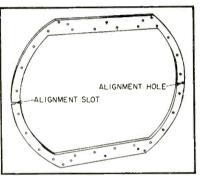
Spacer frame. Aperture mask is bolted to one side of this frame, glass plate, carrying phosphor dots, to other side. Screen assembly is then bolted inside metal shell
